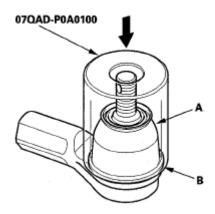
Installing Boot Using Attachment Courtesy of AMERICAN HONDA MOTOR CO., INC.
